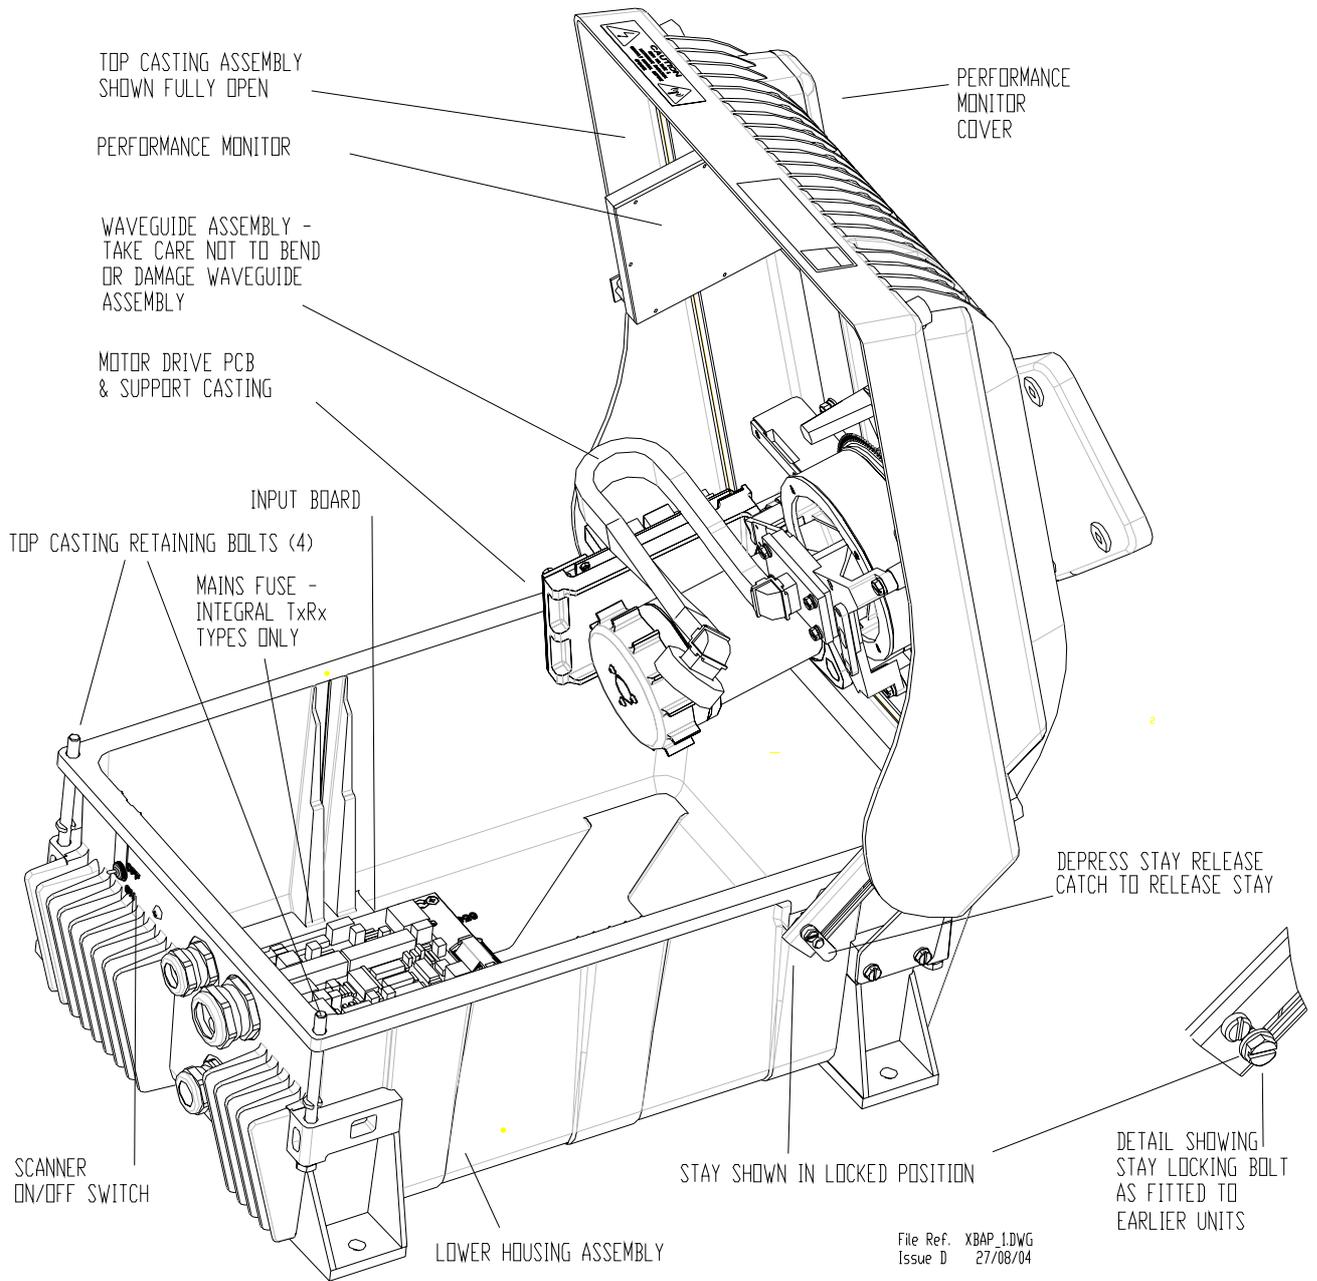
X-Band Bulkhead Turning Unit – View showing Main Assemblies
